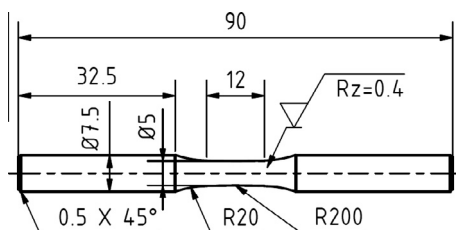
Specimen geometry for mechanical investigations (all dimensions in mm).
